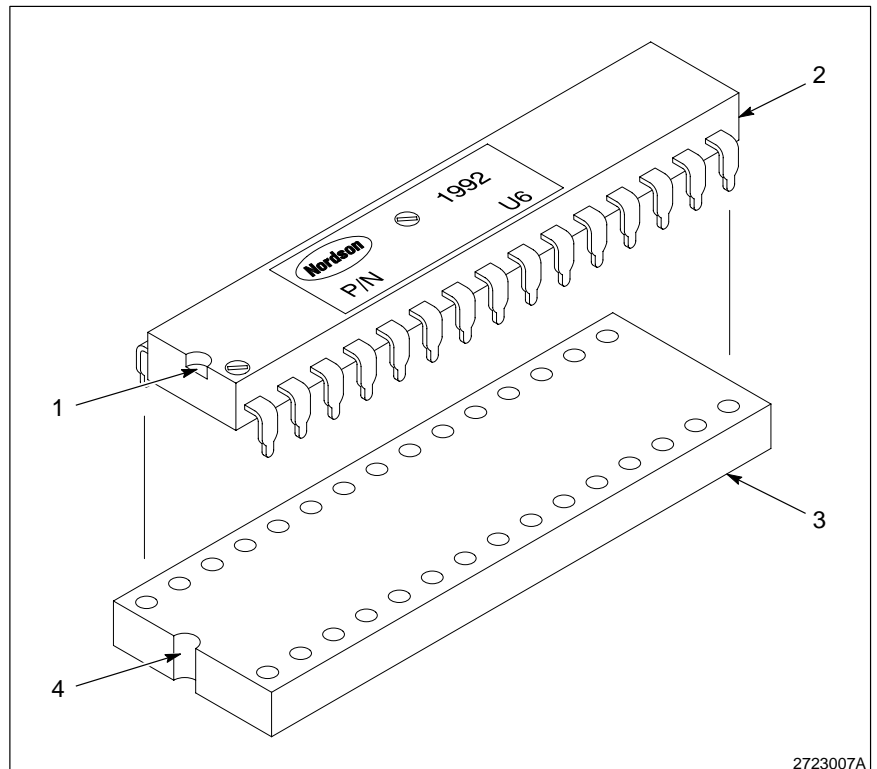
Installing the CPU Board Chip Without the Chip Installation Tool
